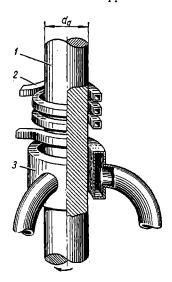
Relative positions of inductor and sprayer when hardening a shaft: 1-shaft; 2-inductor; 3-sprayer
